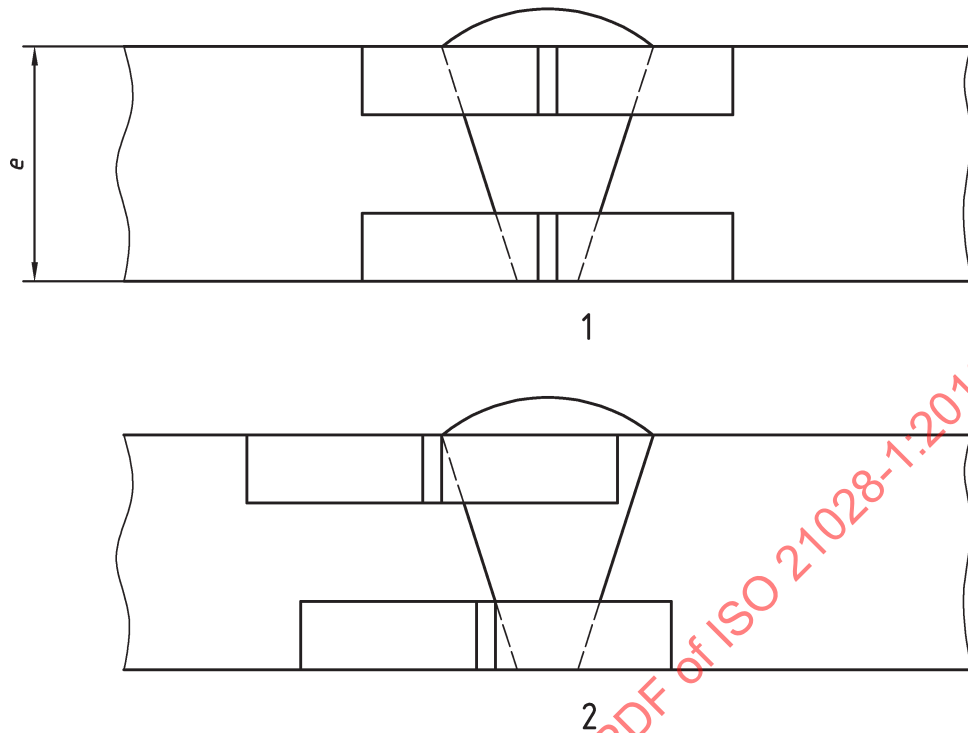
Test pieces for $10 \text{ mm} < e \leq 20 \text{ mm}$
